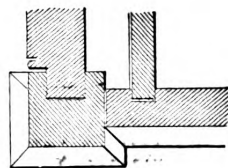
Horizontal Section through Front Angle of Cabinet and Drawer.
